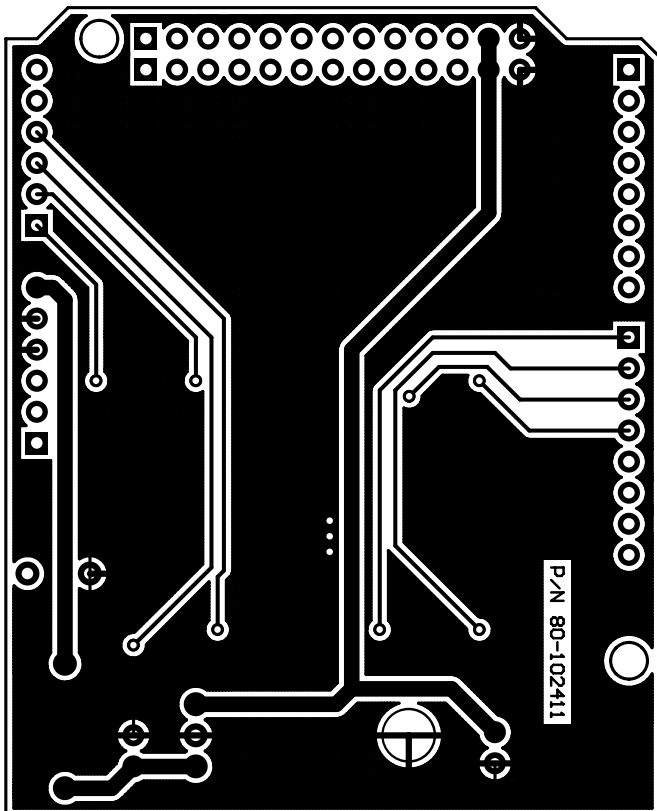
LED Matrix Common Cathode Driver Shield PCB Copper Pattern (Bottom Layer)
